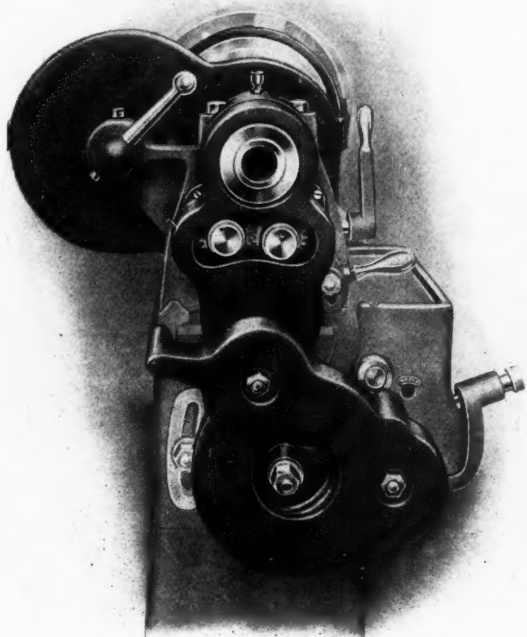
Method of guarding Change Gears of Walcott Engine Lathes
